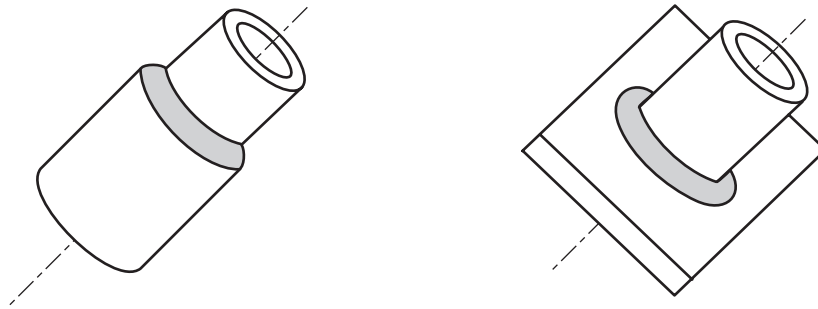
Welding Test Positions and Their Designations for Fillet Welds in Pipe
